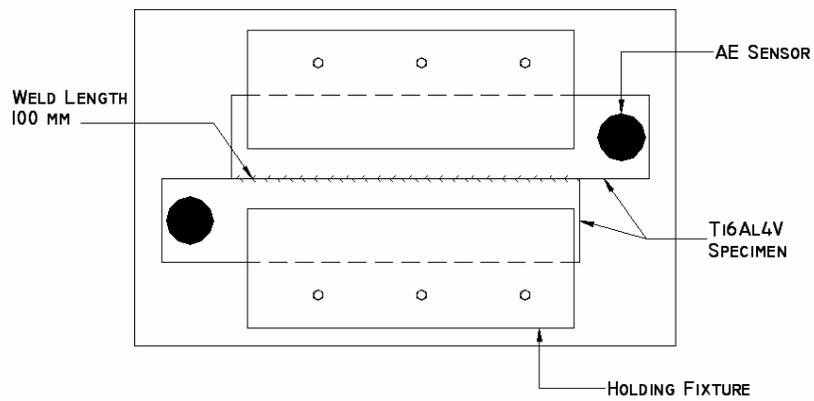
Ti6Al4V Weld Specimens with AE Sensors
